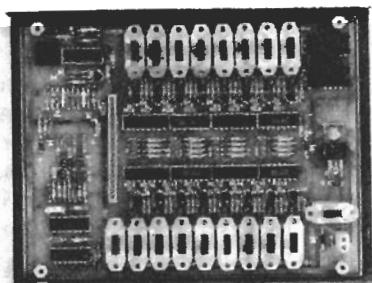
YOUR FINISHED MAIN BOARD should look like this before you install a top cover.
